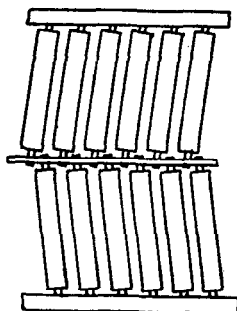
HERRINGBONE ROLLER CONVEYOR
